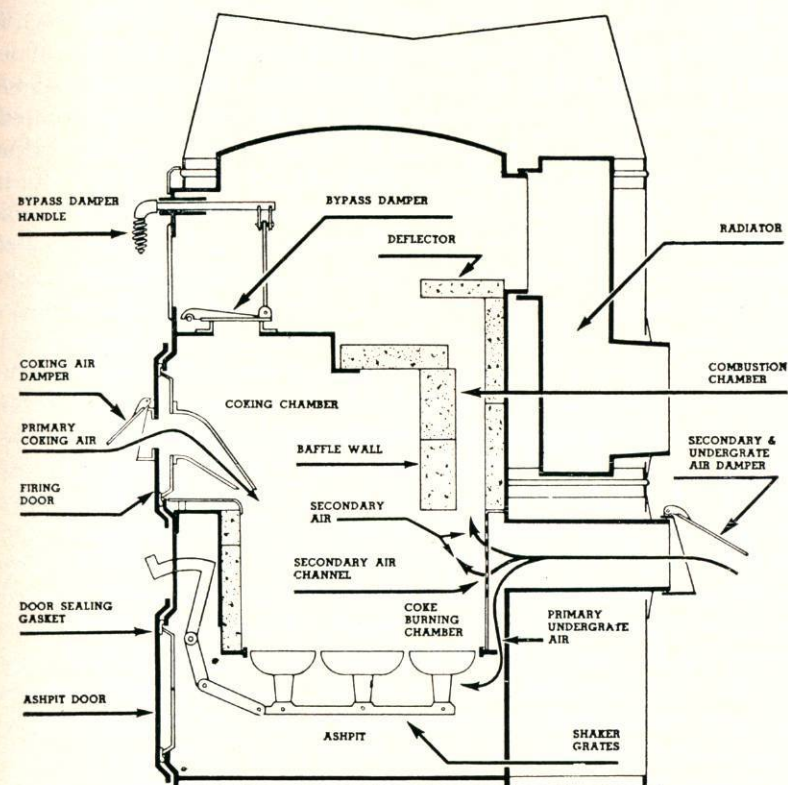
VERTICAL CROSS-SECTIONAL VIEW OF COMPLETE ASSEMBLY
